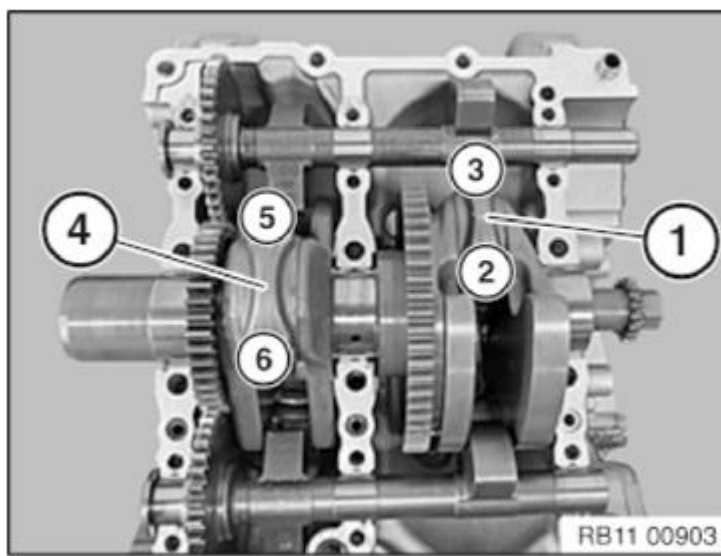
Identifying Connecting Rod And Bearing Cap
